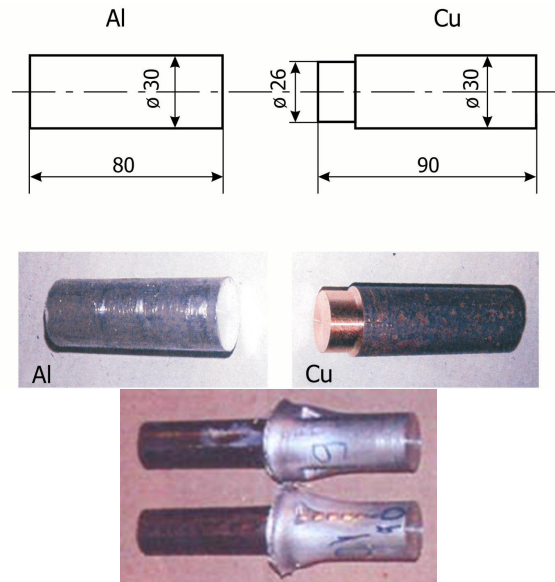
Technical drawing and physical appearance of initial and welded Al-Cu samples
